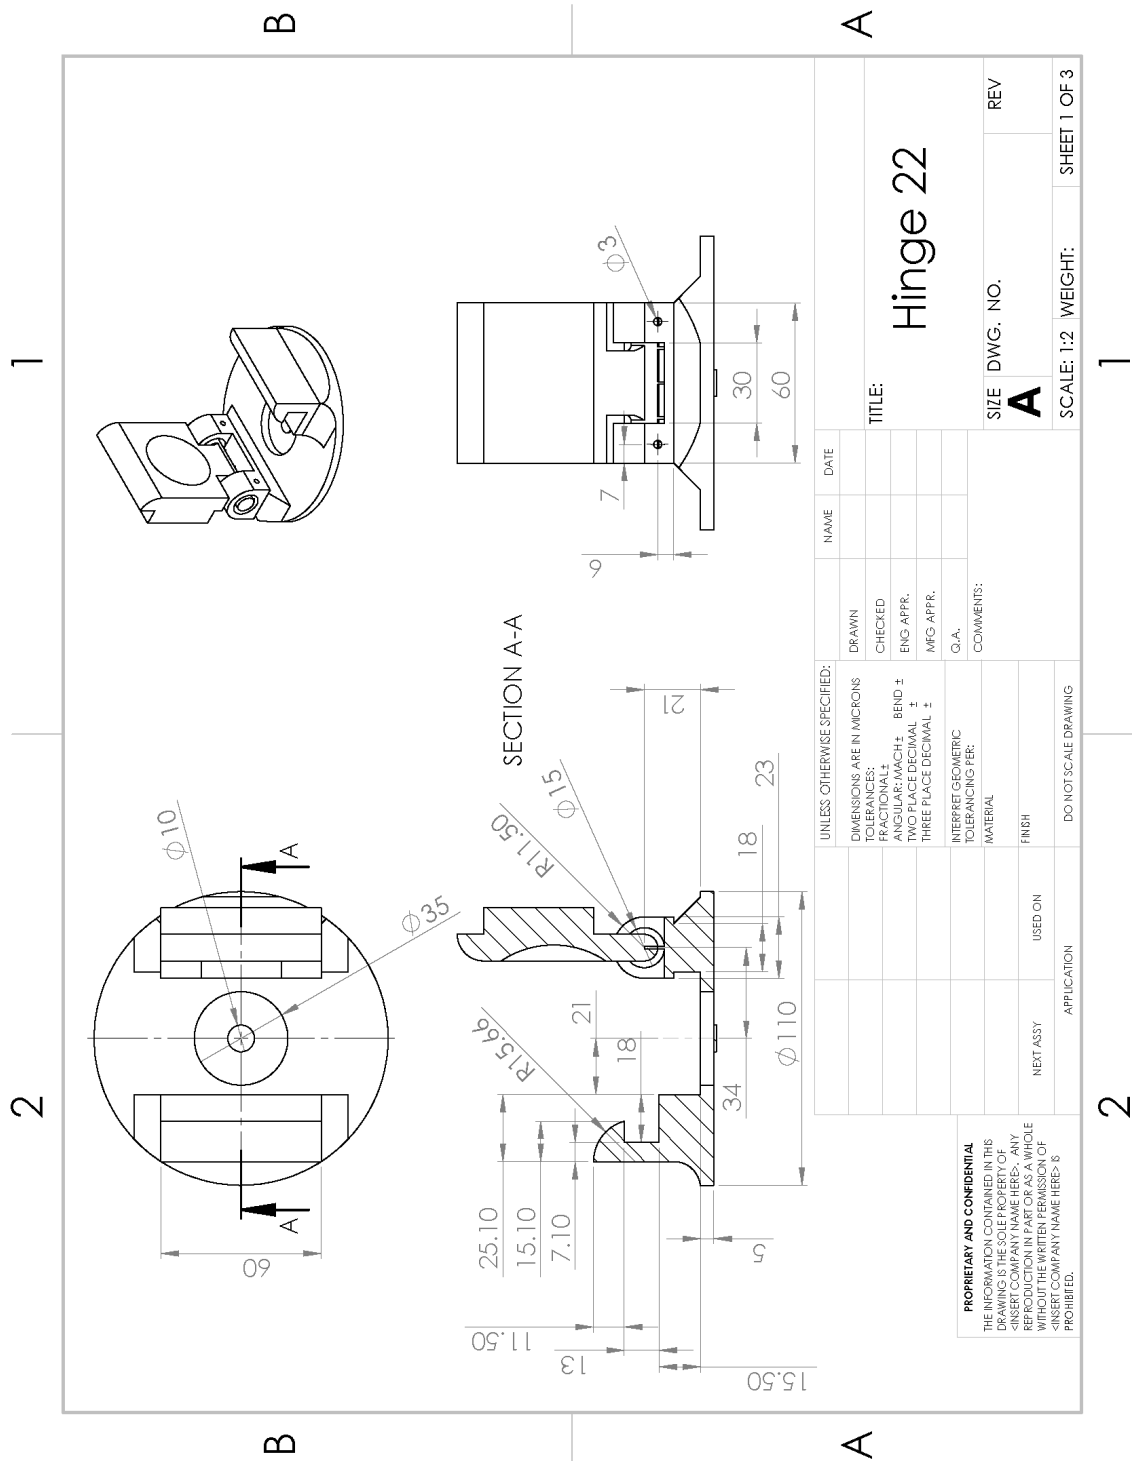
Technical drawing of the hinged FP cavity RI sensor, page 1.
